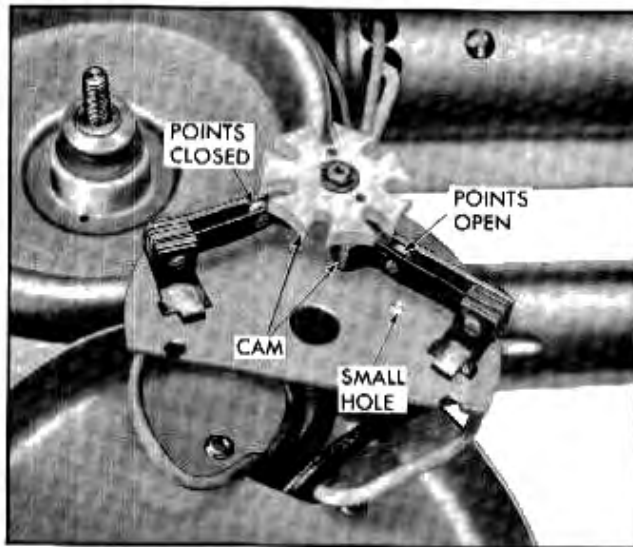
Proper Position of Star Wheel Before Assembly
